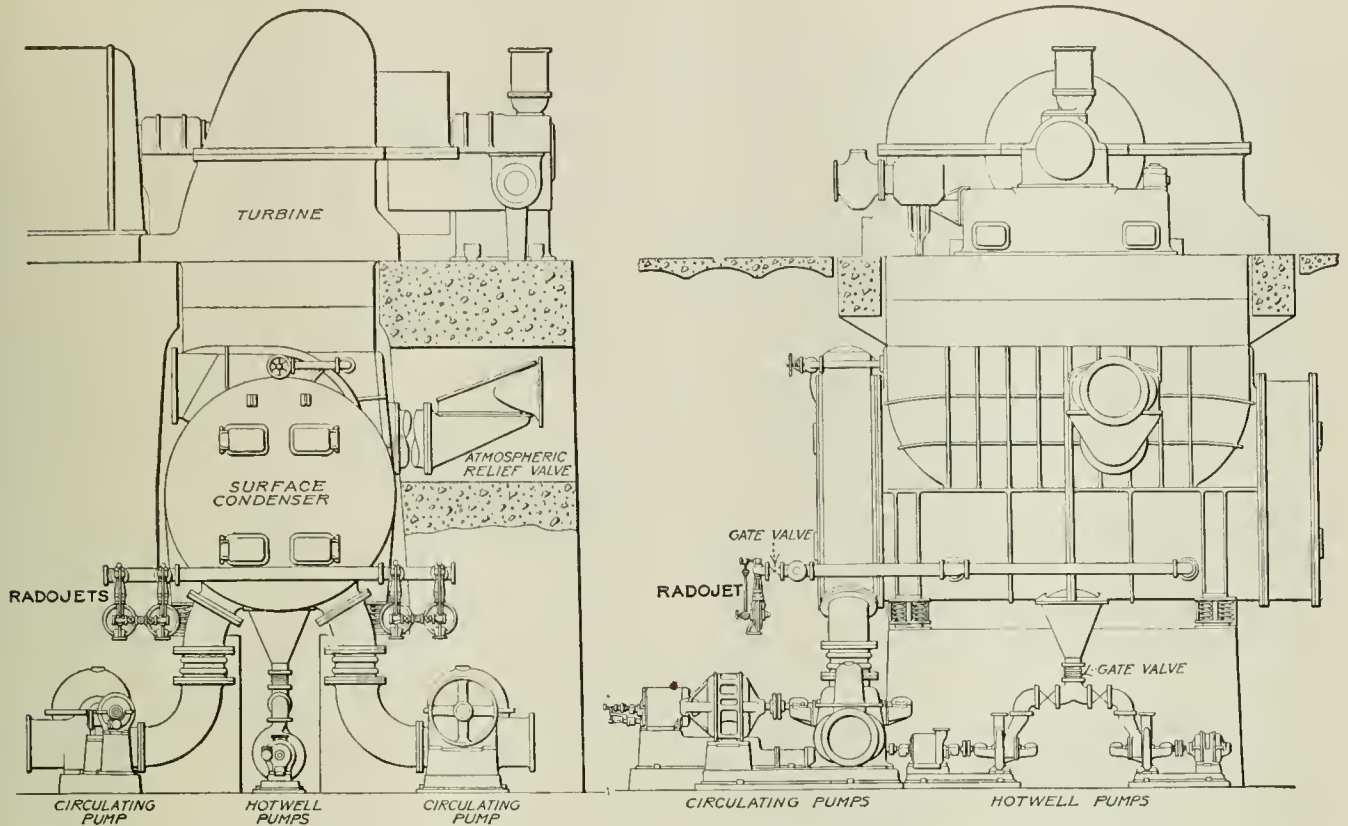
END AND SIDE VIEW OF SURFACE CONDENSER EQUIPPED WITH RADOJET AIR PUMPS
